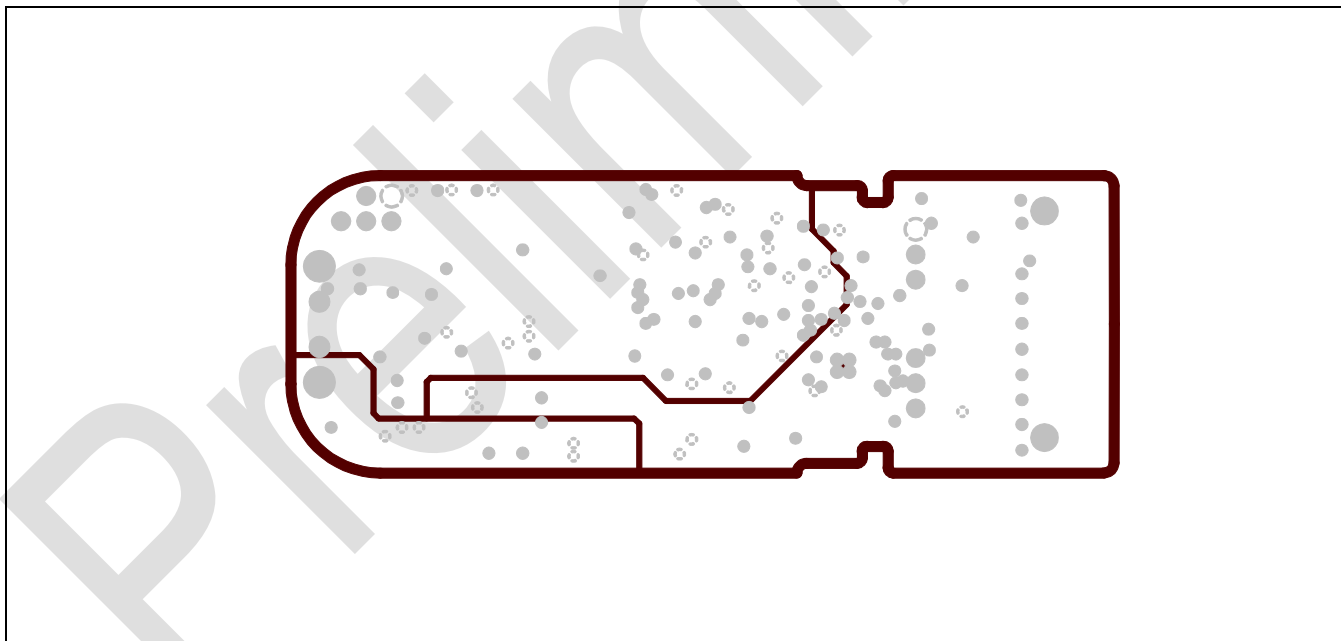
Layout Top Layer ZIOL2401 Starter Kit Extension Board
